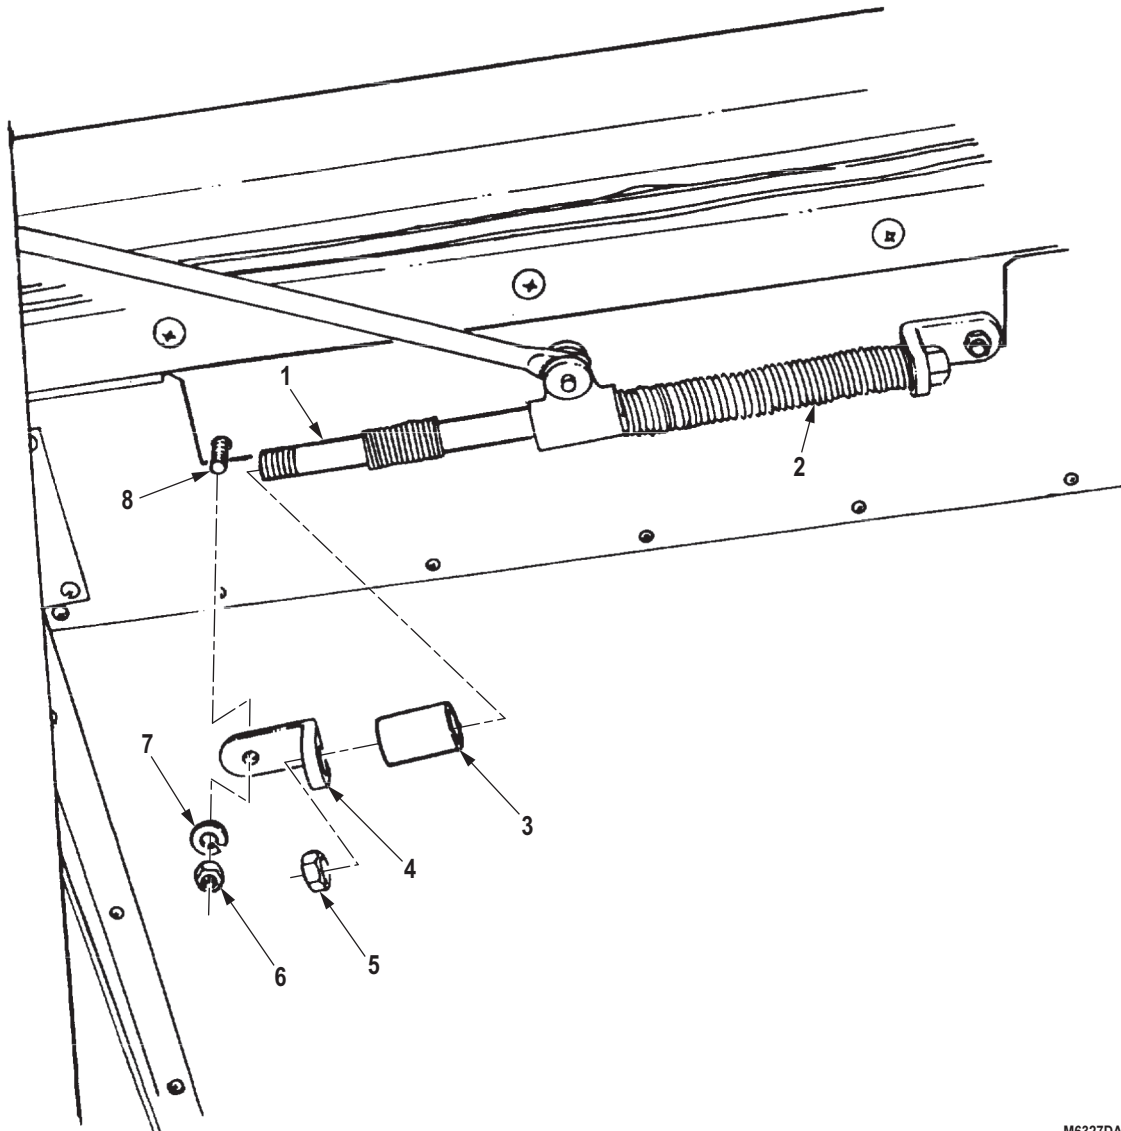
Van Handrail Component Installation (M934/A1/A2).
